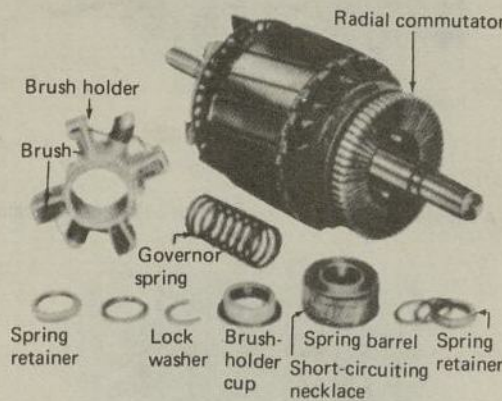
A partly dismantled rotor and parts of the centrifugal mechanism.
